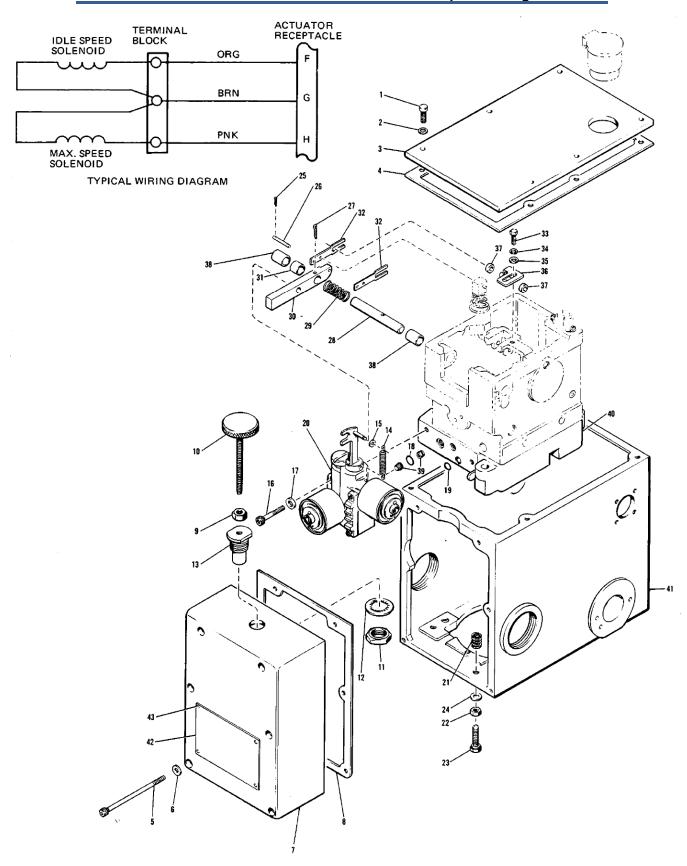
Two-Solenoid Speed Setting Mechanism Parts
